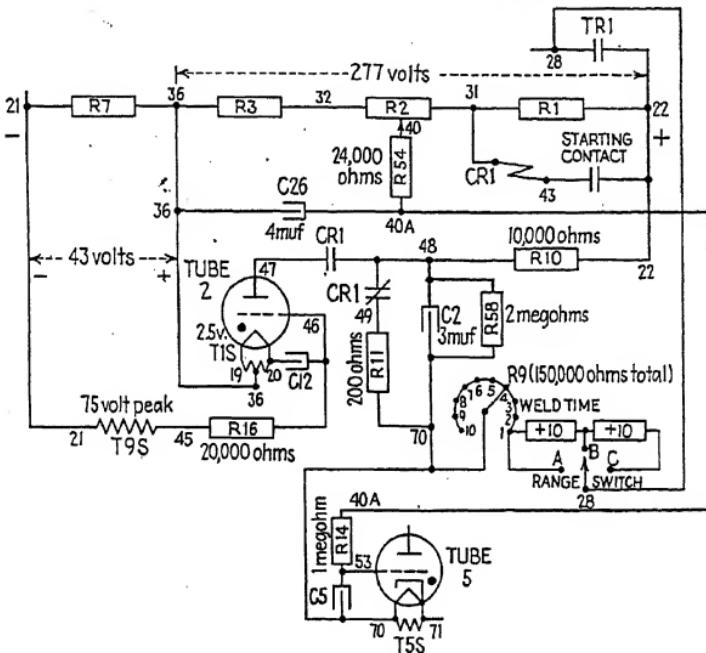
A.—Timing circuit of spot-welding control (CR7503-A124).
